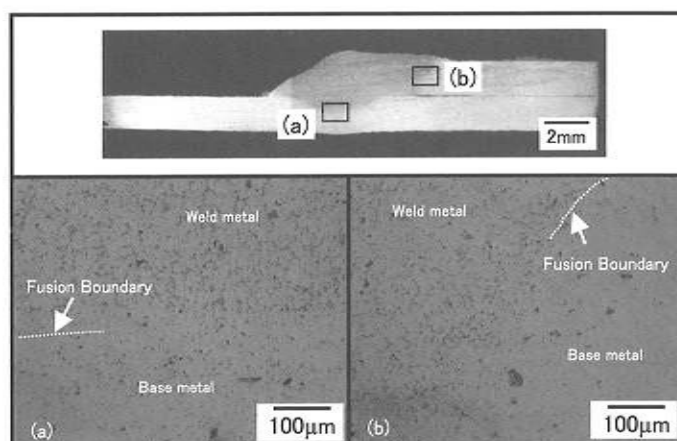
Microstructure of cross section at fusion boundary of MIG lap joining weld at welding current 75 A and welding speed 150 cm/min; (a) Lower sheet side, (b) Upper sheet side.
